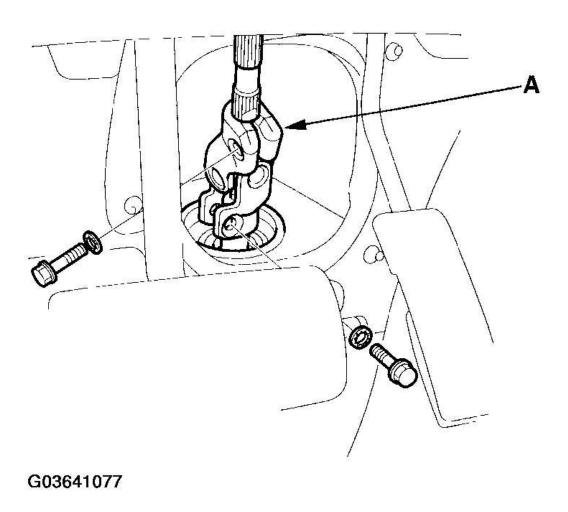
Removing Steering Joint Cover Courtesy of AMERICAN HONDA MOTOR CO., INC.
